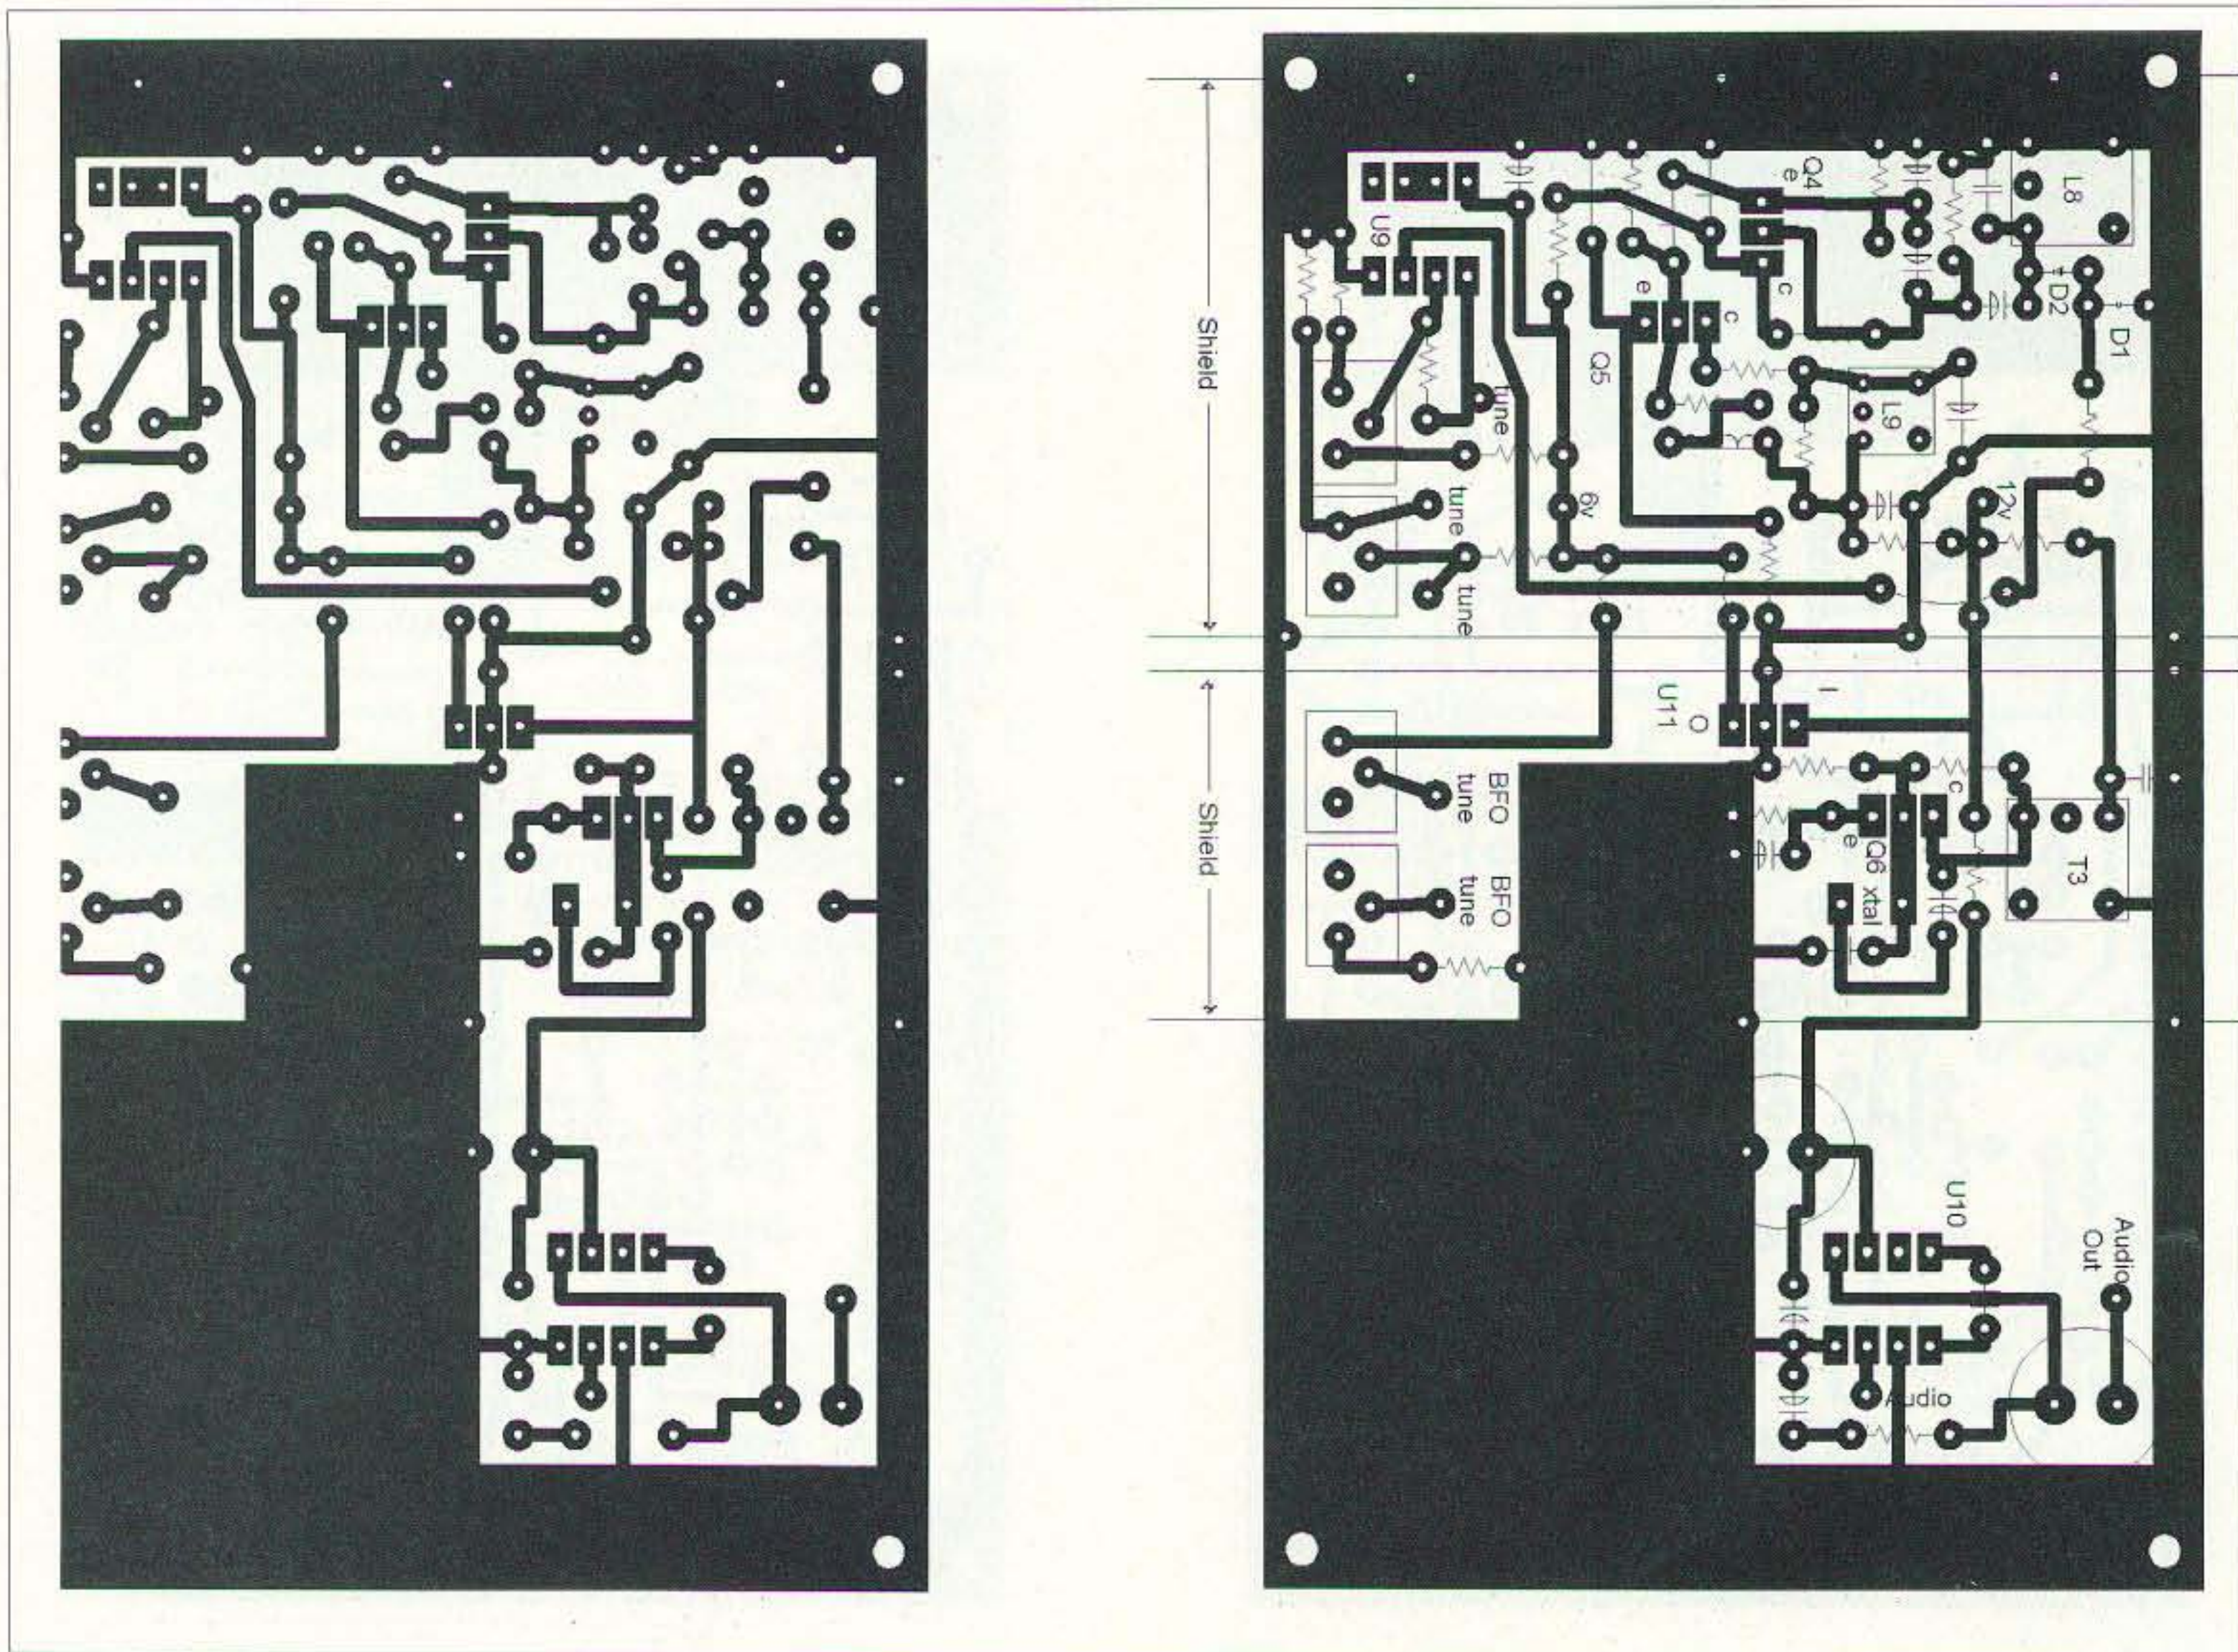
(a) Oscillator board. (b) Parts layout from foil side.
